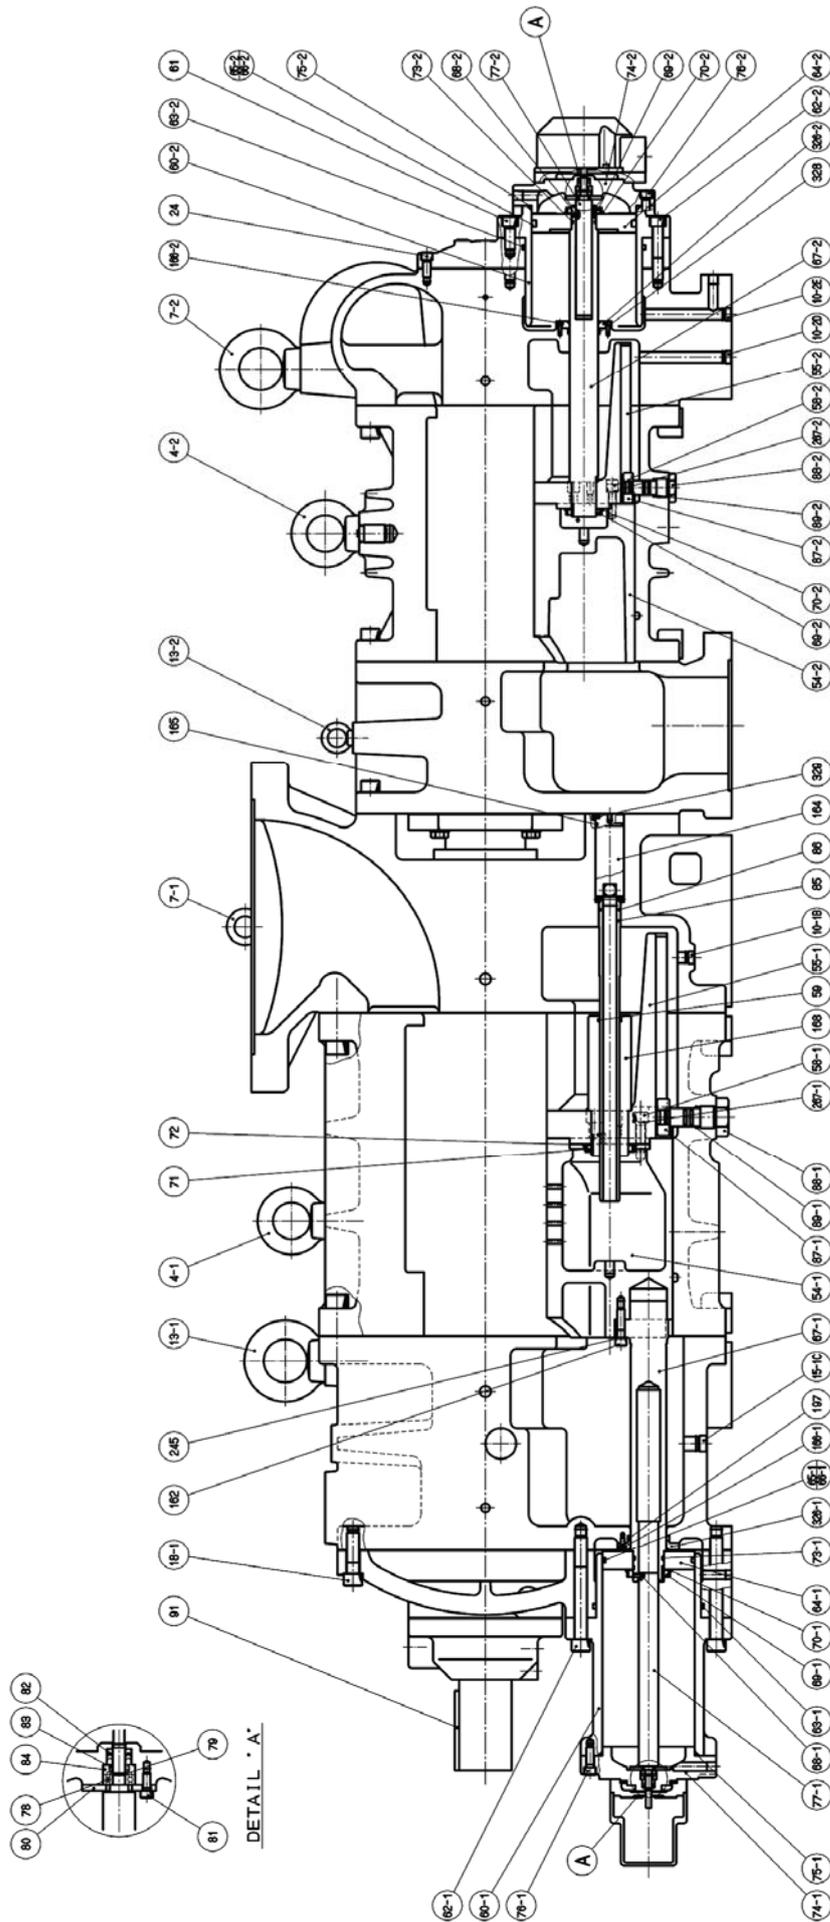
3225LLC Assembly Sectional View (Vertical)
